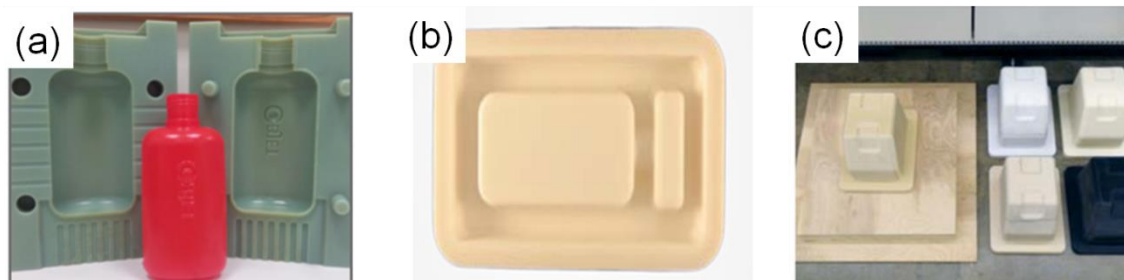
Examples of 3DP application in packaging industry: (a) blowing mold, (b) fibre filling mold and (c) thermoforming tool. Adapted of (Stratasys, 2015).
